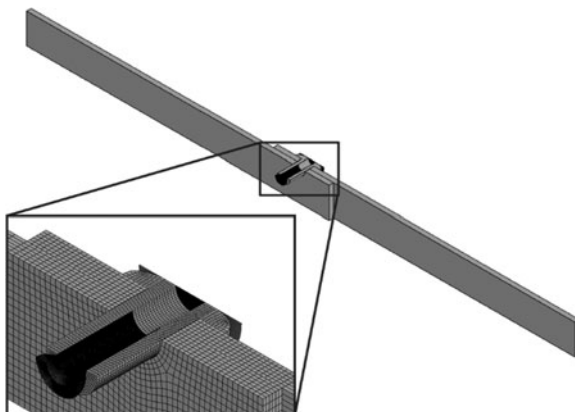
Geometry of the riveted joint (dimensions in mm) used to tune the parameters of the metal damage models
